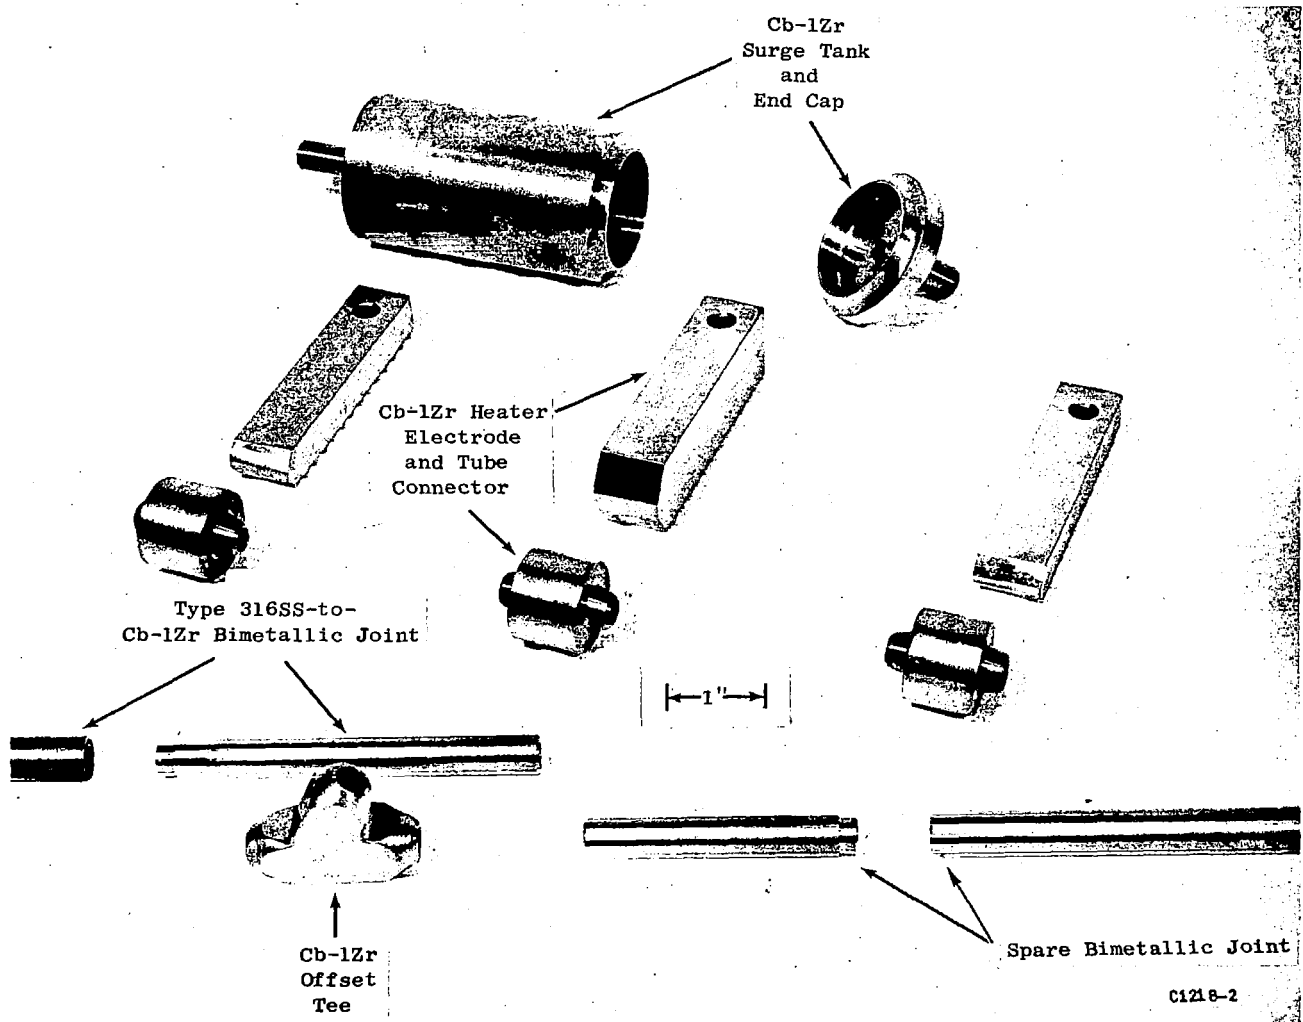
Machined Parts of the Sodium Thermal Convection Loop Prior to Welding.
